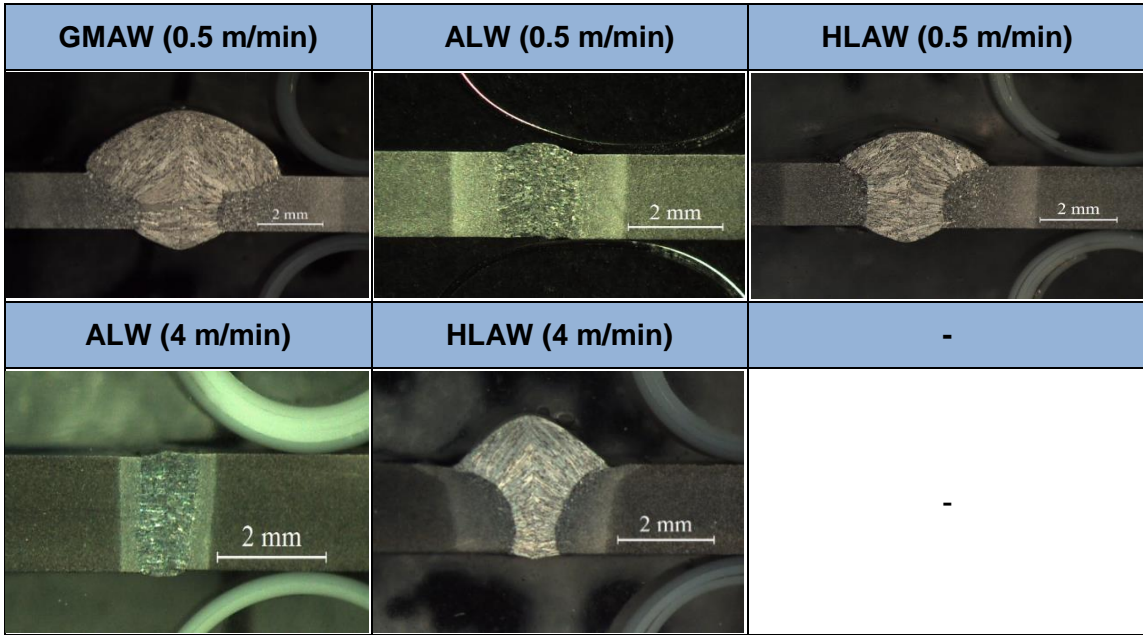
Macrographs of specimen welded by different welding processes at different travel speeds – 2 mm thickness
